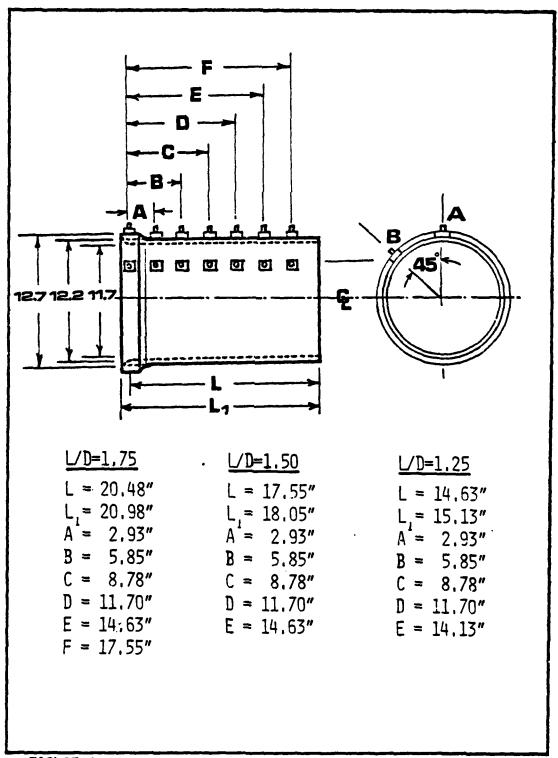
DIMENSIONS FOR SHORT MIXING STACKS INVESTIGATED
